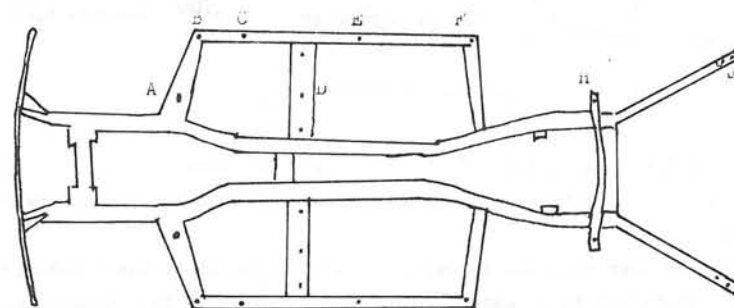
Herald MK 11 1200 & 13/60 Chassis - body mounting points
